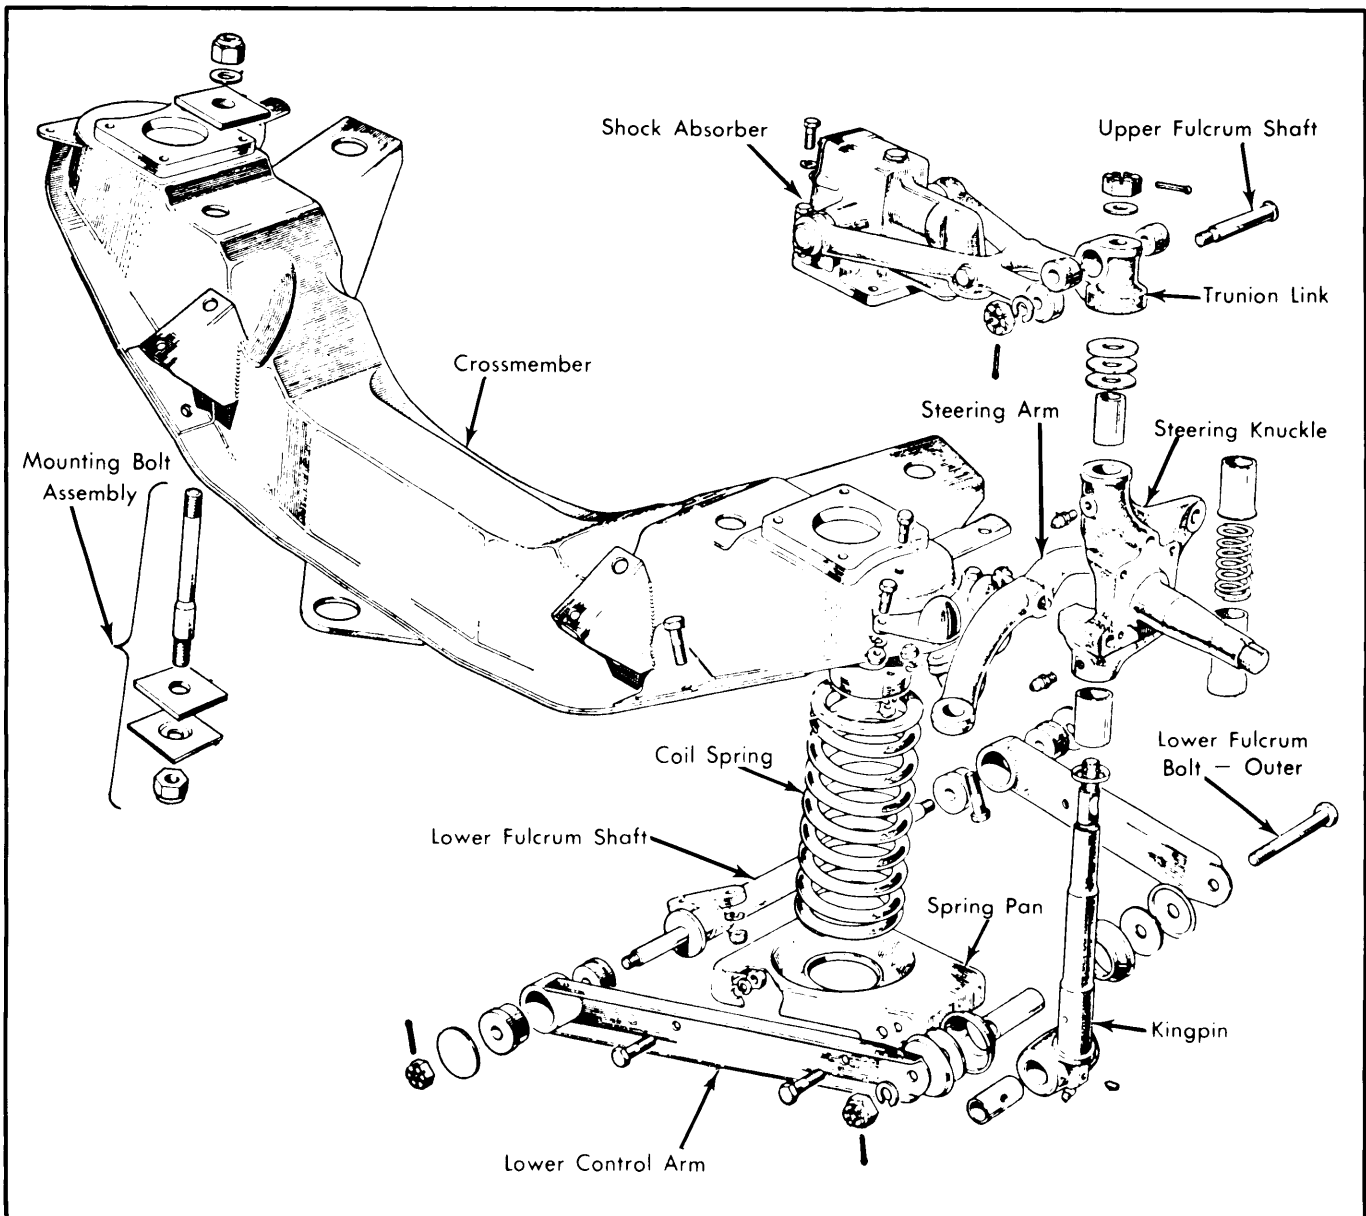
Exploded View of Front Suspension Components for Part Identification
